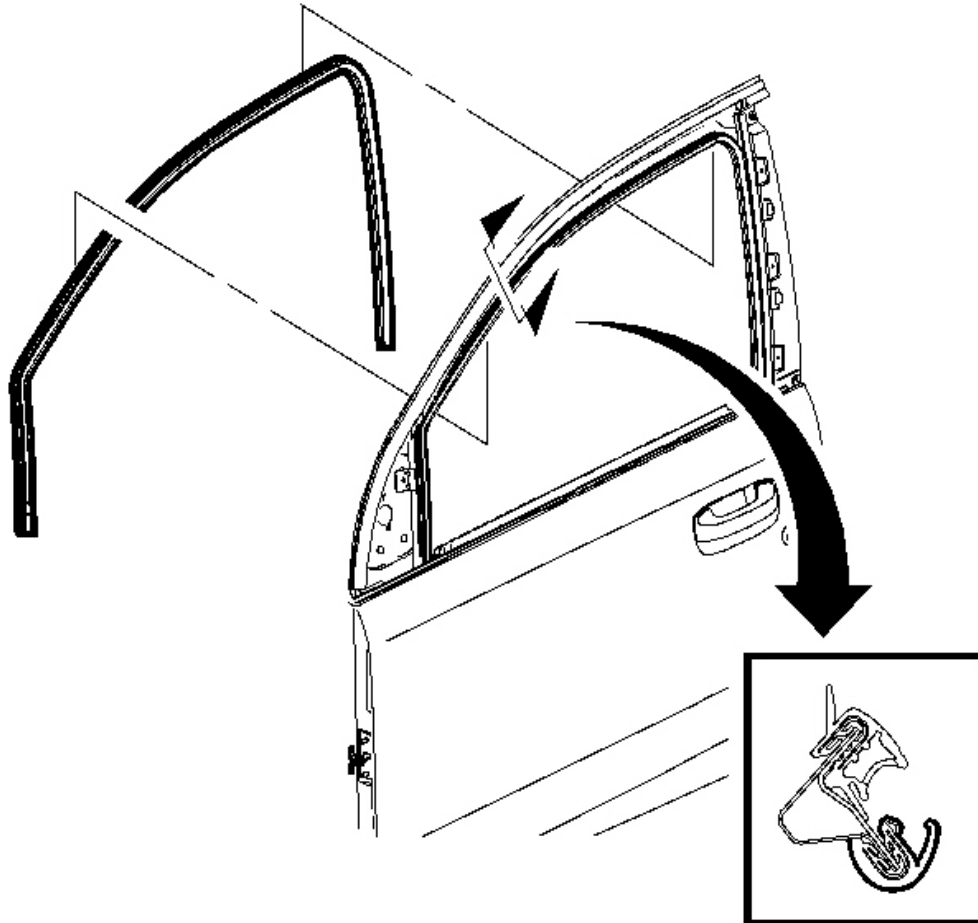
View Of Front Window Weatherstrip Run Channel Assembly
